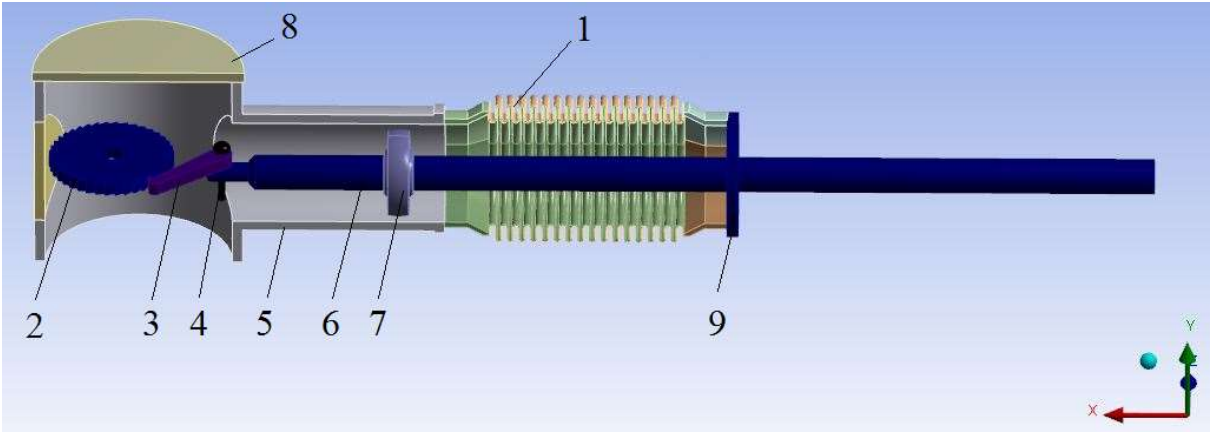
CAD model of the RGM in global coordinate system, with following components [75]: 1. two-ply bellows; 2. ratchet wheel; 3. pawl; 4. a bolt connection; 5. ratchet gear housing; 6. lever; 7. rod end bearing; 8. housing cover; 9. bellows cover.
